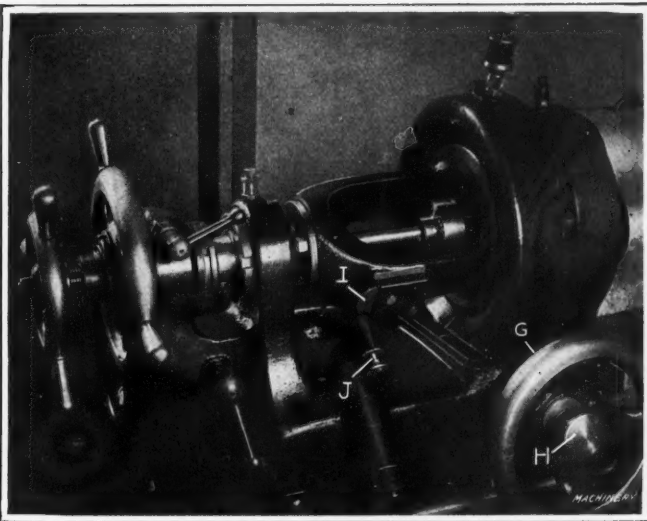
Close View of Work-head and Cam for releasing Cutter-head
